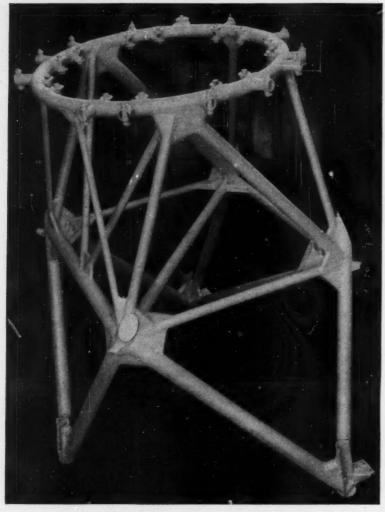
Above—Corrosion protection for a steel PBM engine mount provided by sprayed 72S aluminum alloy lasts indefinitely
